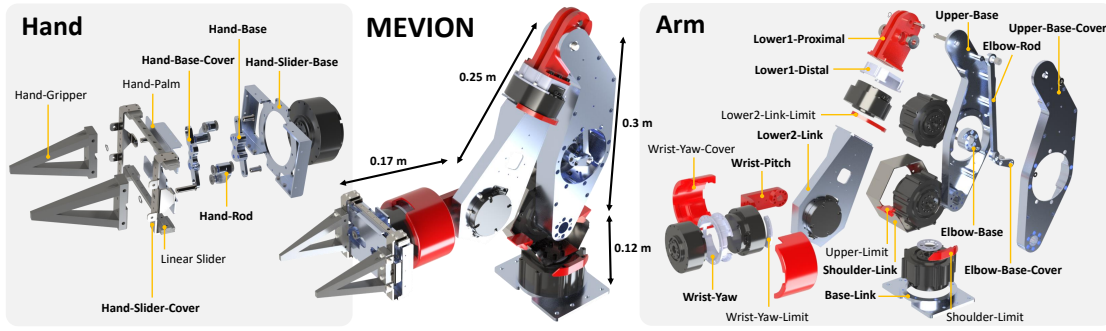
Design overview of MEVION: The design is divided into the arm and hand, comprising 17 essential metal components in total — 11 in the arm and 6 in the hand, three of which are fabricated through sheet metal welding to form single integrated parts with complex and large geometries.
